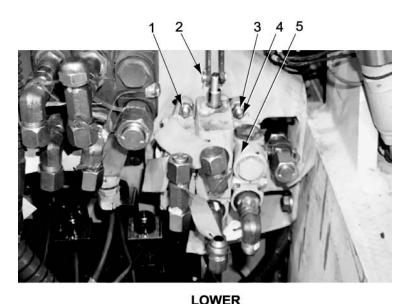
Mounting of DCV Bank and Suspension (Sprung/Unsprung) Valve/Lower View)
